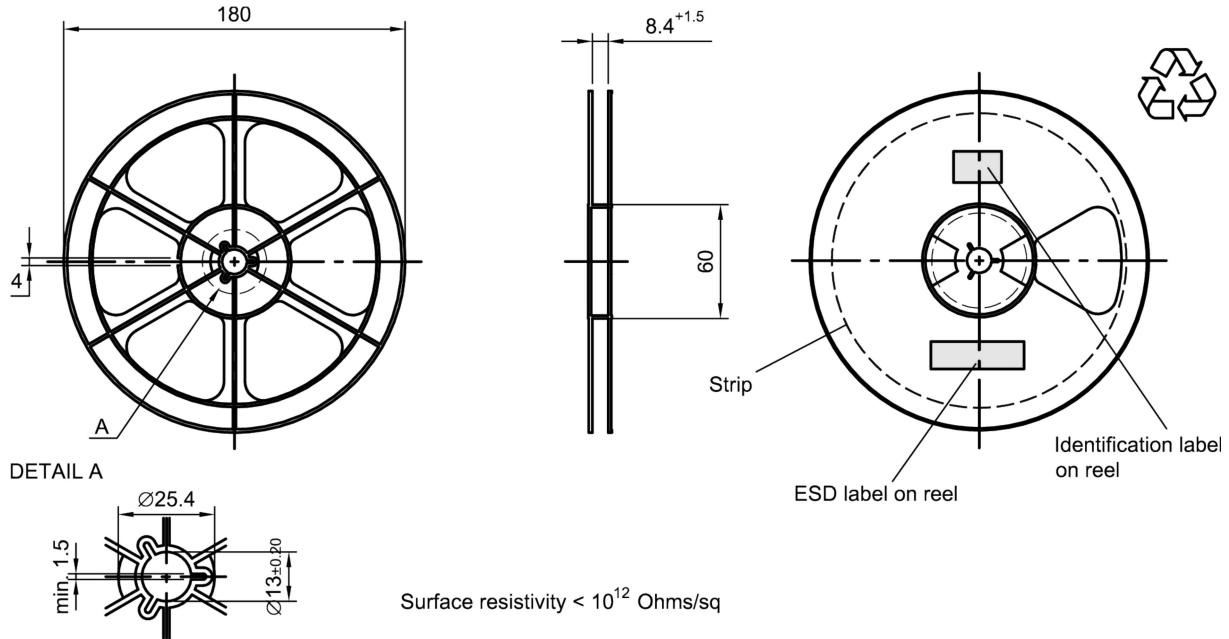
Drawing of reel (first-angle projection) with diameter of 180 mm.
